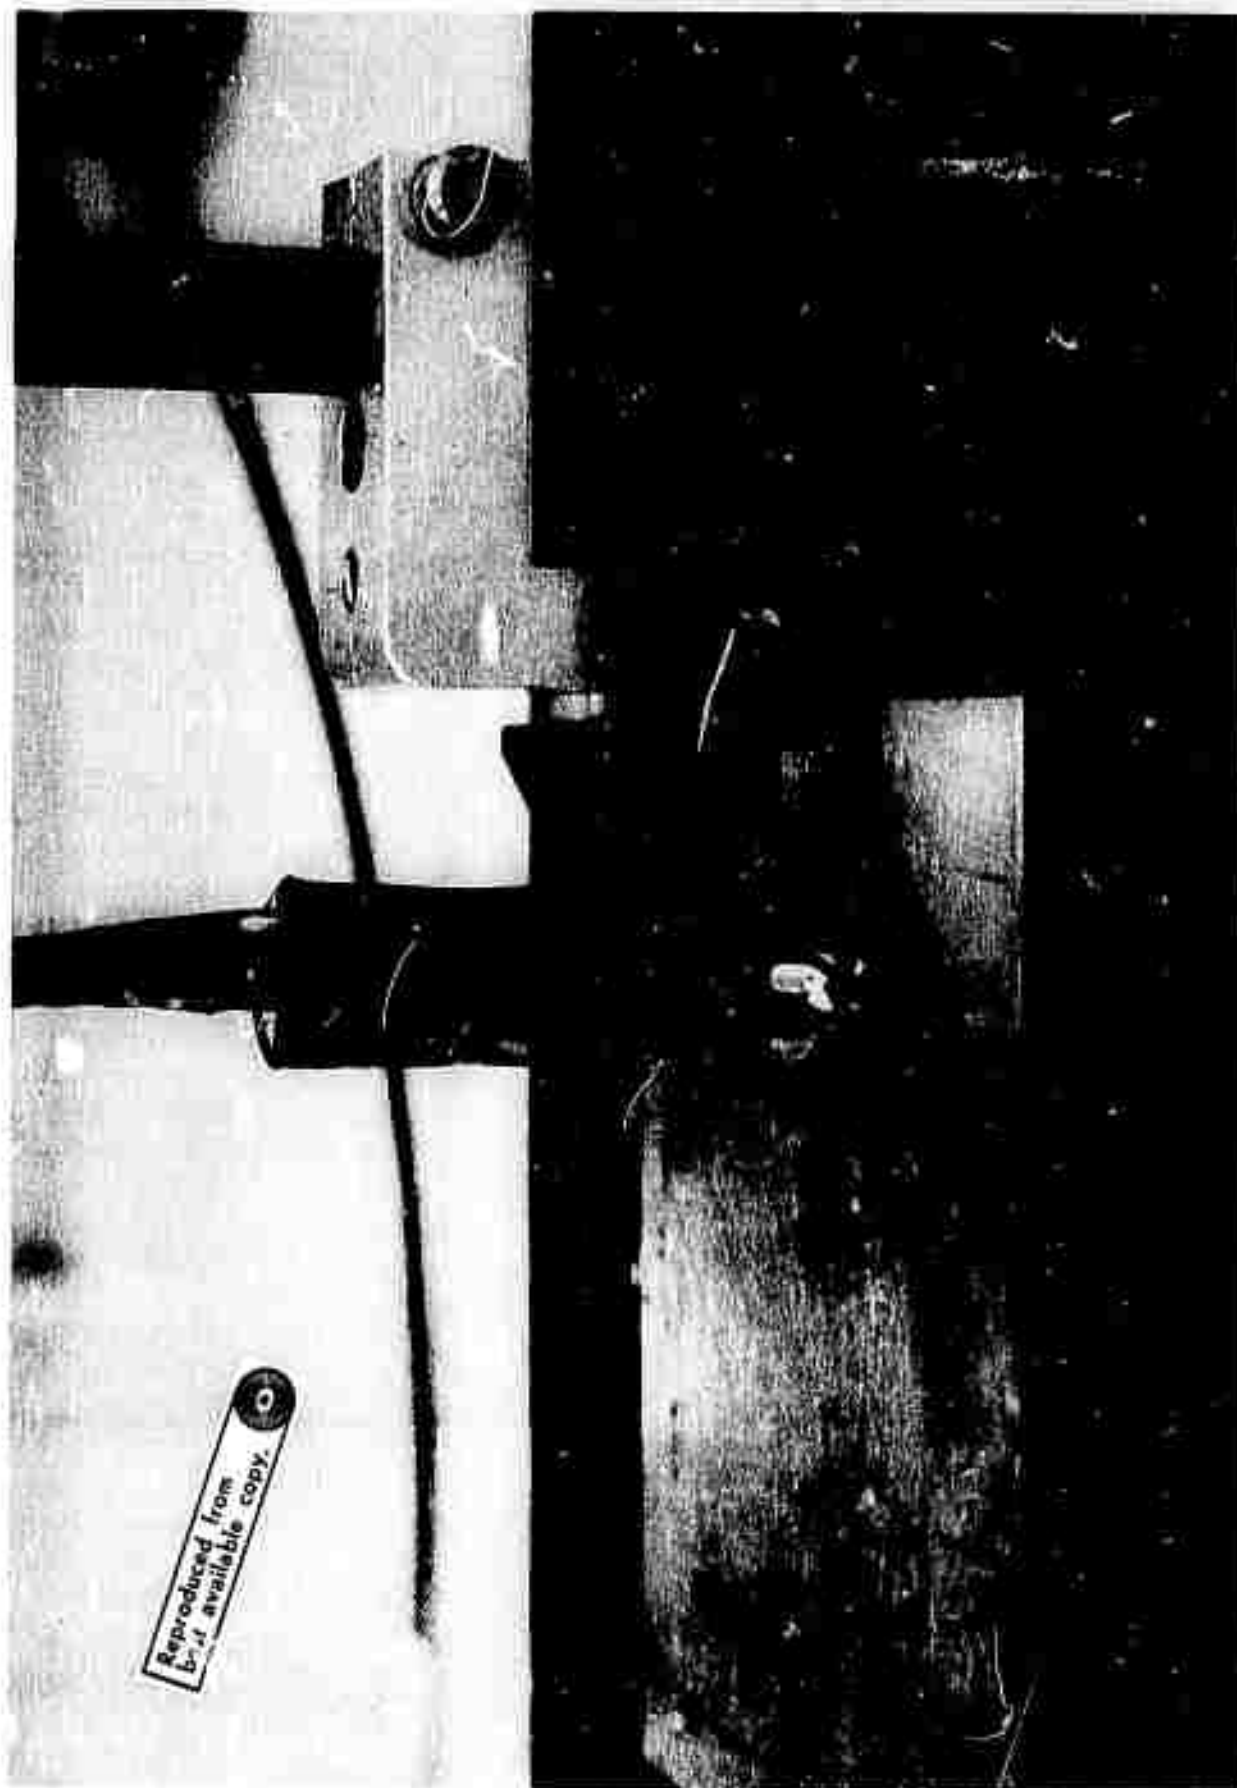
PHOTOGRAPH OF PROBE AND TEST PART
